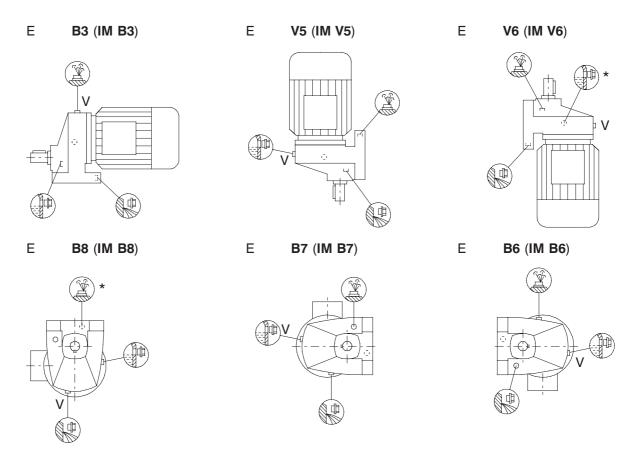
Mounting positions for E Size 20 - 140
